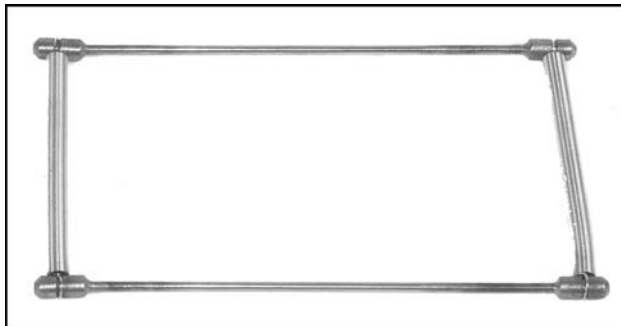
Piston Gauge Pins (0.082 in), ZTSE4513
